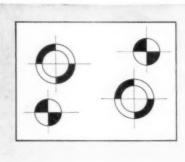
Above rests are machined faces of the fixture. More effective results are obtained, however, when rests and stops are designed as separate blocks screwed on to the fixture.
